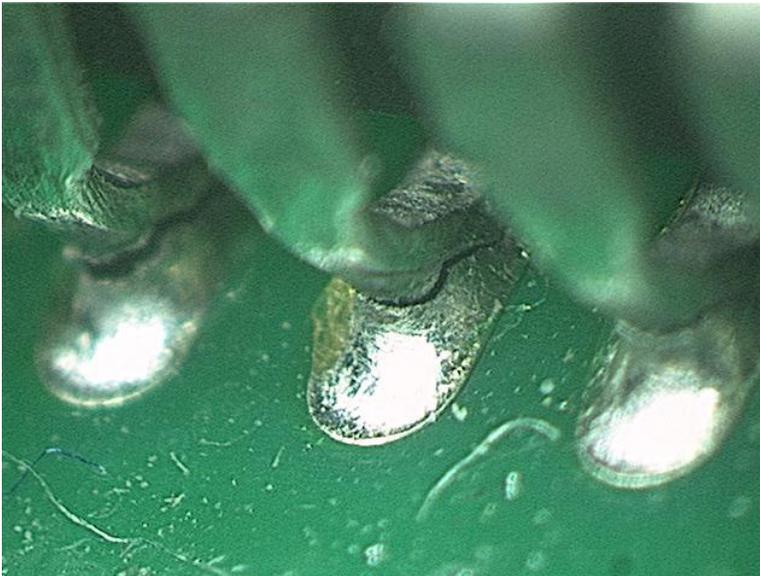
Cracked solder Joints for Piece Part with “J leads”
